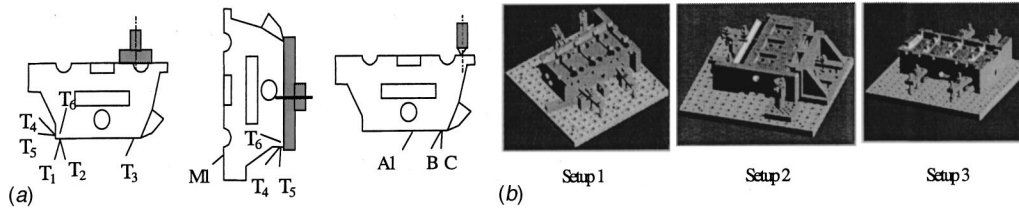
(a) Operational sequence (b) fixture locating schemes & setups
